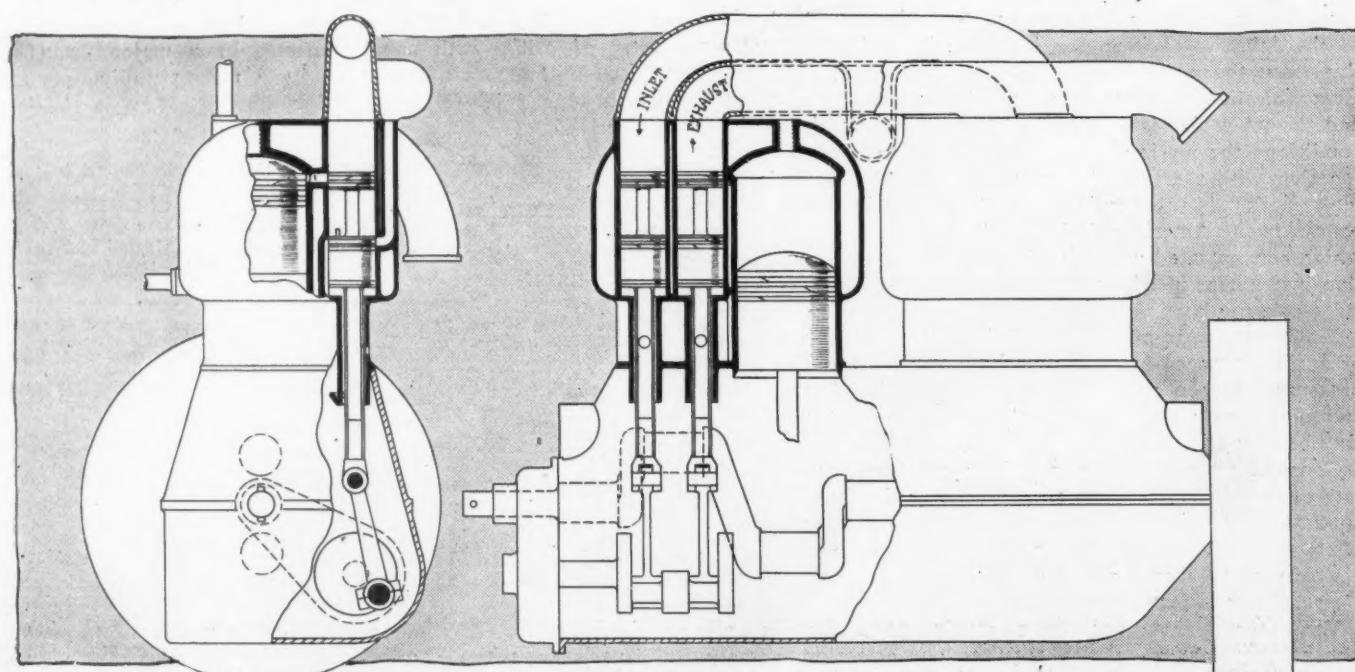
Sectional views of Laycock piston-valve motor in which provision is made for scavenging
